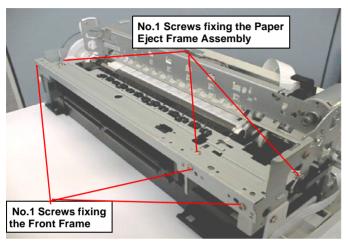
Removing the Font Frame & Paper Eject Frame
